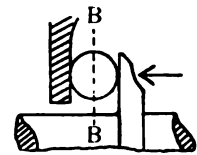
"AXIAL" OR THRUST TYPE BALL BEARING.
